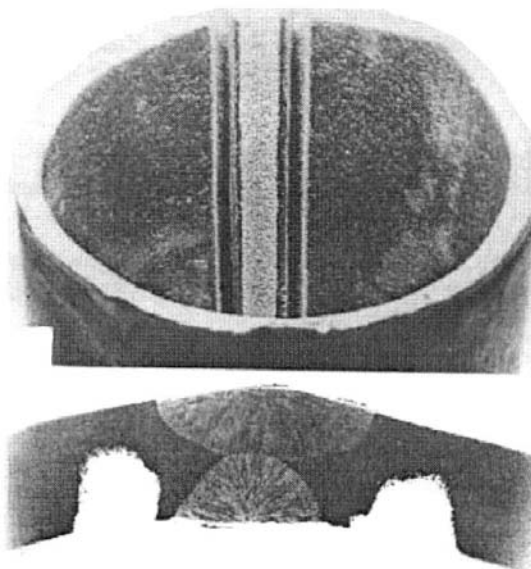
Intergranular corrosion in welded joints of pipes of austenitic stainless steels /2/.
